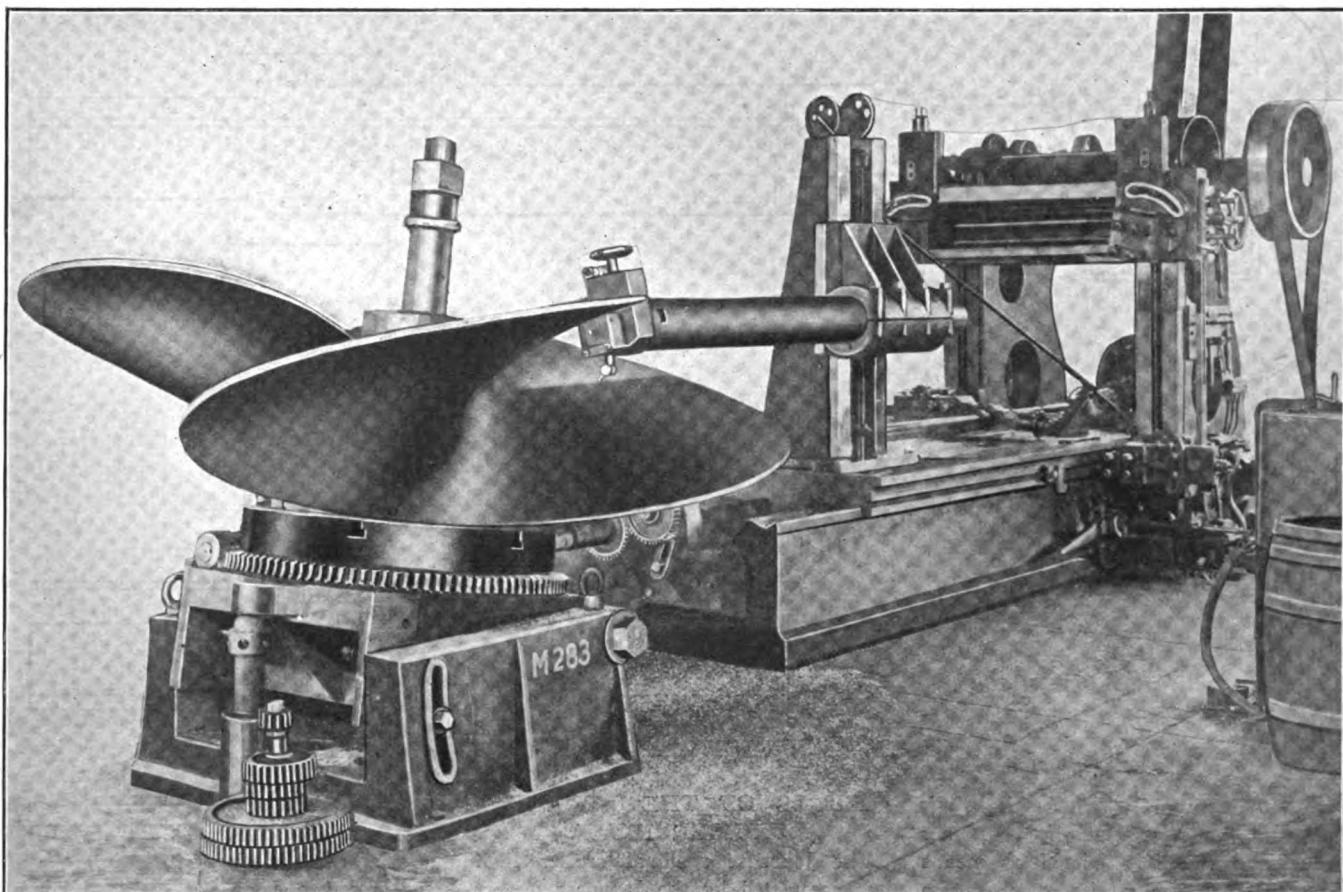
PROPELLER PLANING MACHINE OPERATING ON PROPELLER WITH RAKING BLADES.
